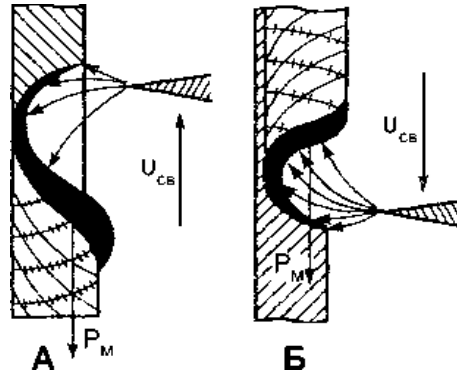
Types of position of the electrode moment of welding (vertical position)
